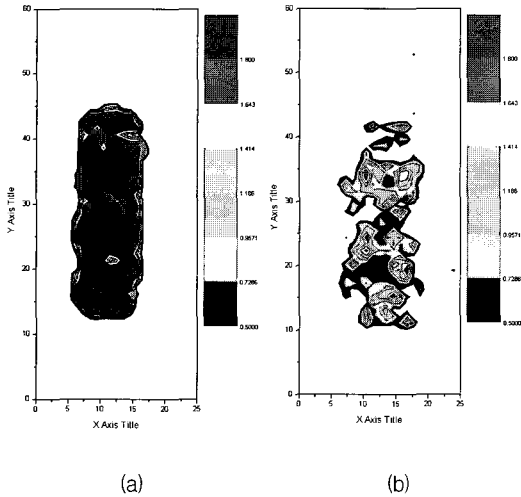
C-scan image obtained in overlay weld of stainless steel (a) Thickness of overlay weld layer= 3 mm(Rectangular defect) (b) Thickness of overlay weld layer=11 mm(Rectangular defect)
